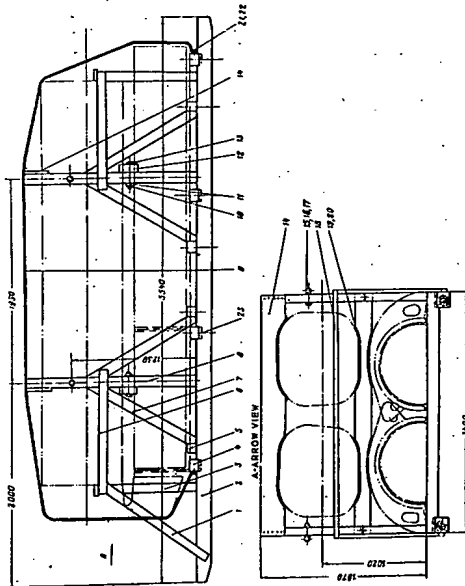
CHASSIS PACKING FOR DUCT AND LOWER PART OF HACHELLE
